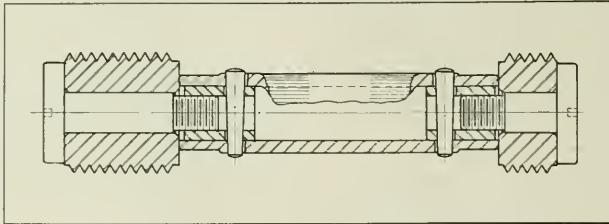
Sectional View showing the Method of attaching the Threaded Plugs to the Hollow Handle
